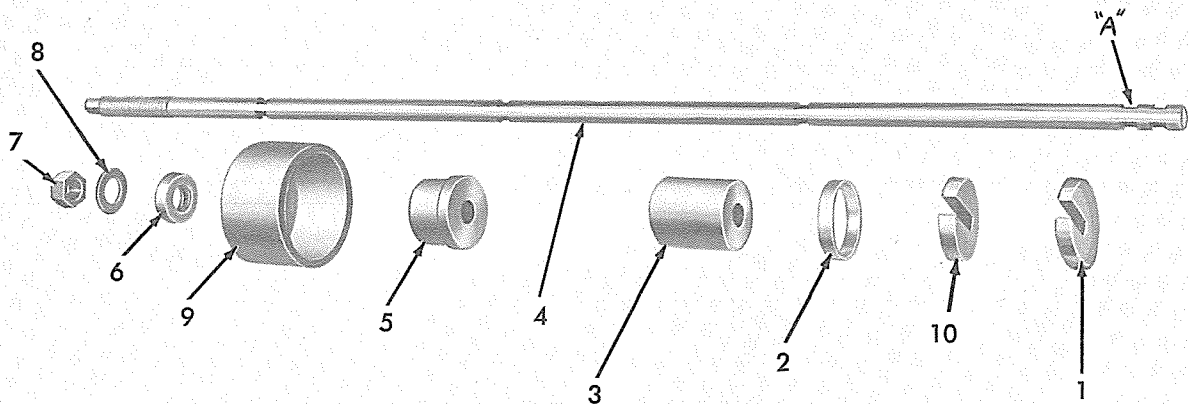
Camshaft Bearing Removing and Installing Tool Set (T-20252)
